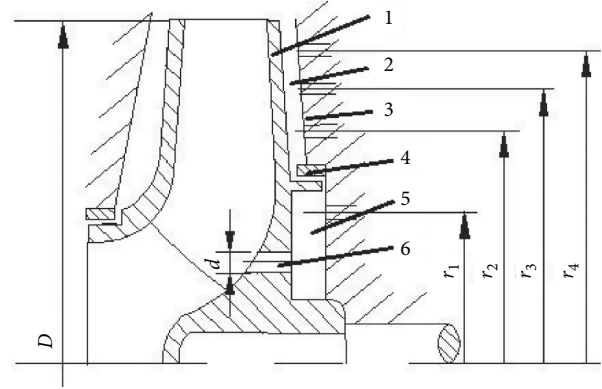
Positions of pressure measurements on the rear chamber. 1: impeller cover; 2: rear chamber; 3: pump cover; 4: impeller seal; 5: balance chamber; 6: balance hole.
